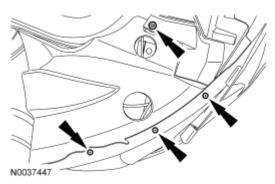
Locating LH Fender Splash Shield Screws Courtesy of FORD MOTOR CO.
